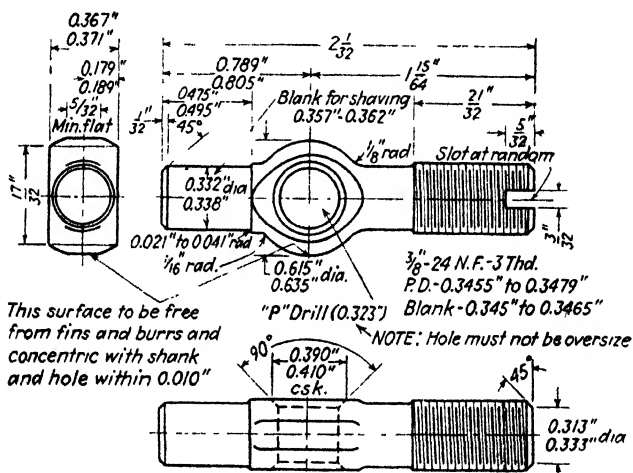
Headed product with eye formed near the center and later flattened in a press.
